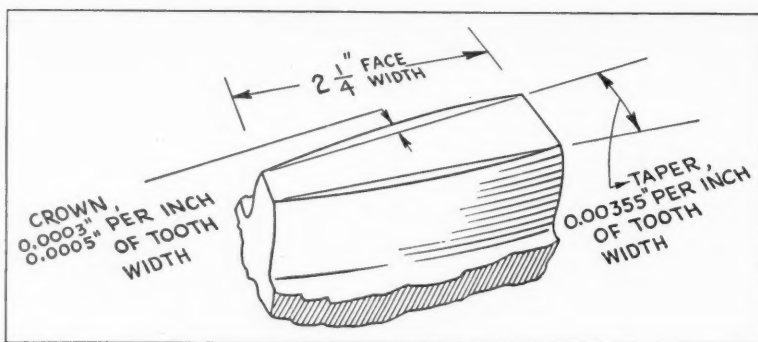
Sketch showing (exaggerated) the taper and crown obtained on gear teeth in "underpass" shaving with reverse-crowned cutters to take care of shaft deflection under heavy loads
